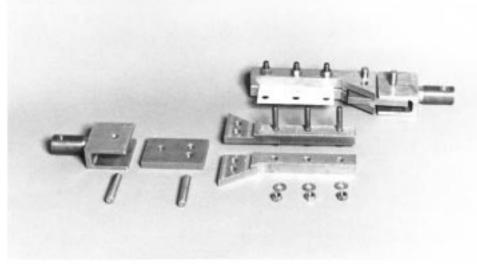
Procedure A Partially Assembled Typical Test Fixture
